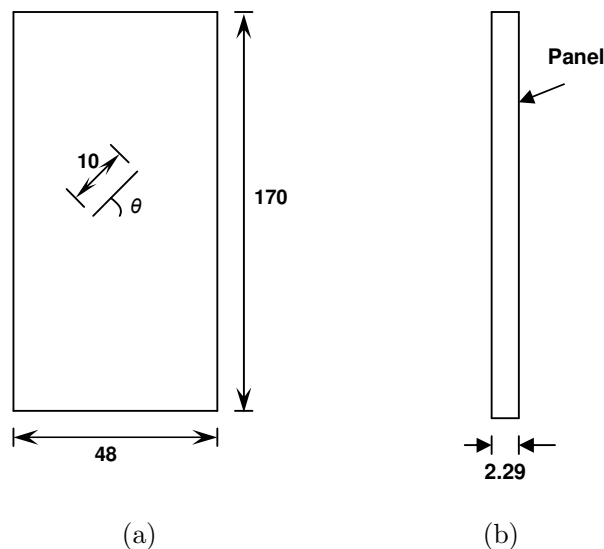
(a) Front view of the inclined center crack panel (b) Side view of the panel (All dimensions are in mm)
